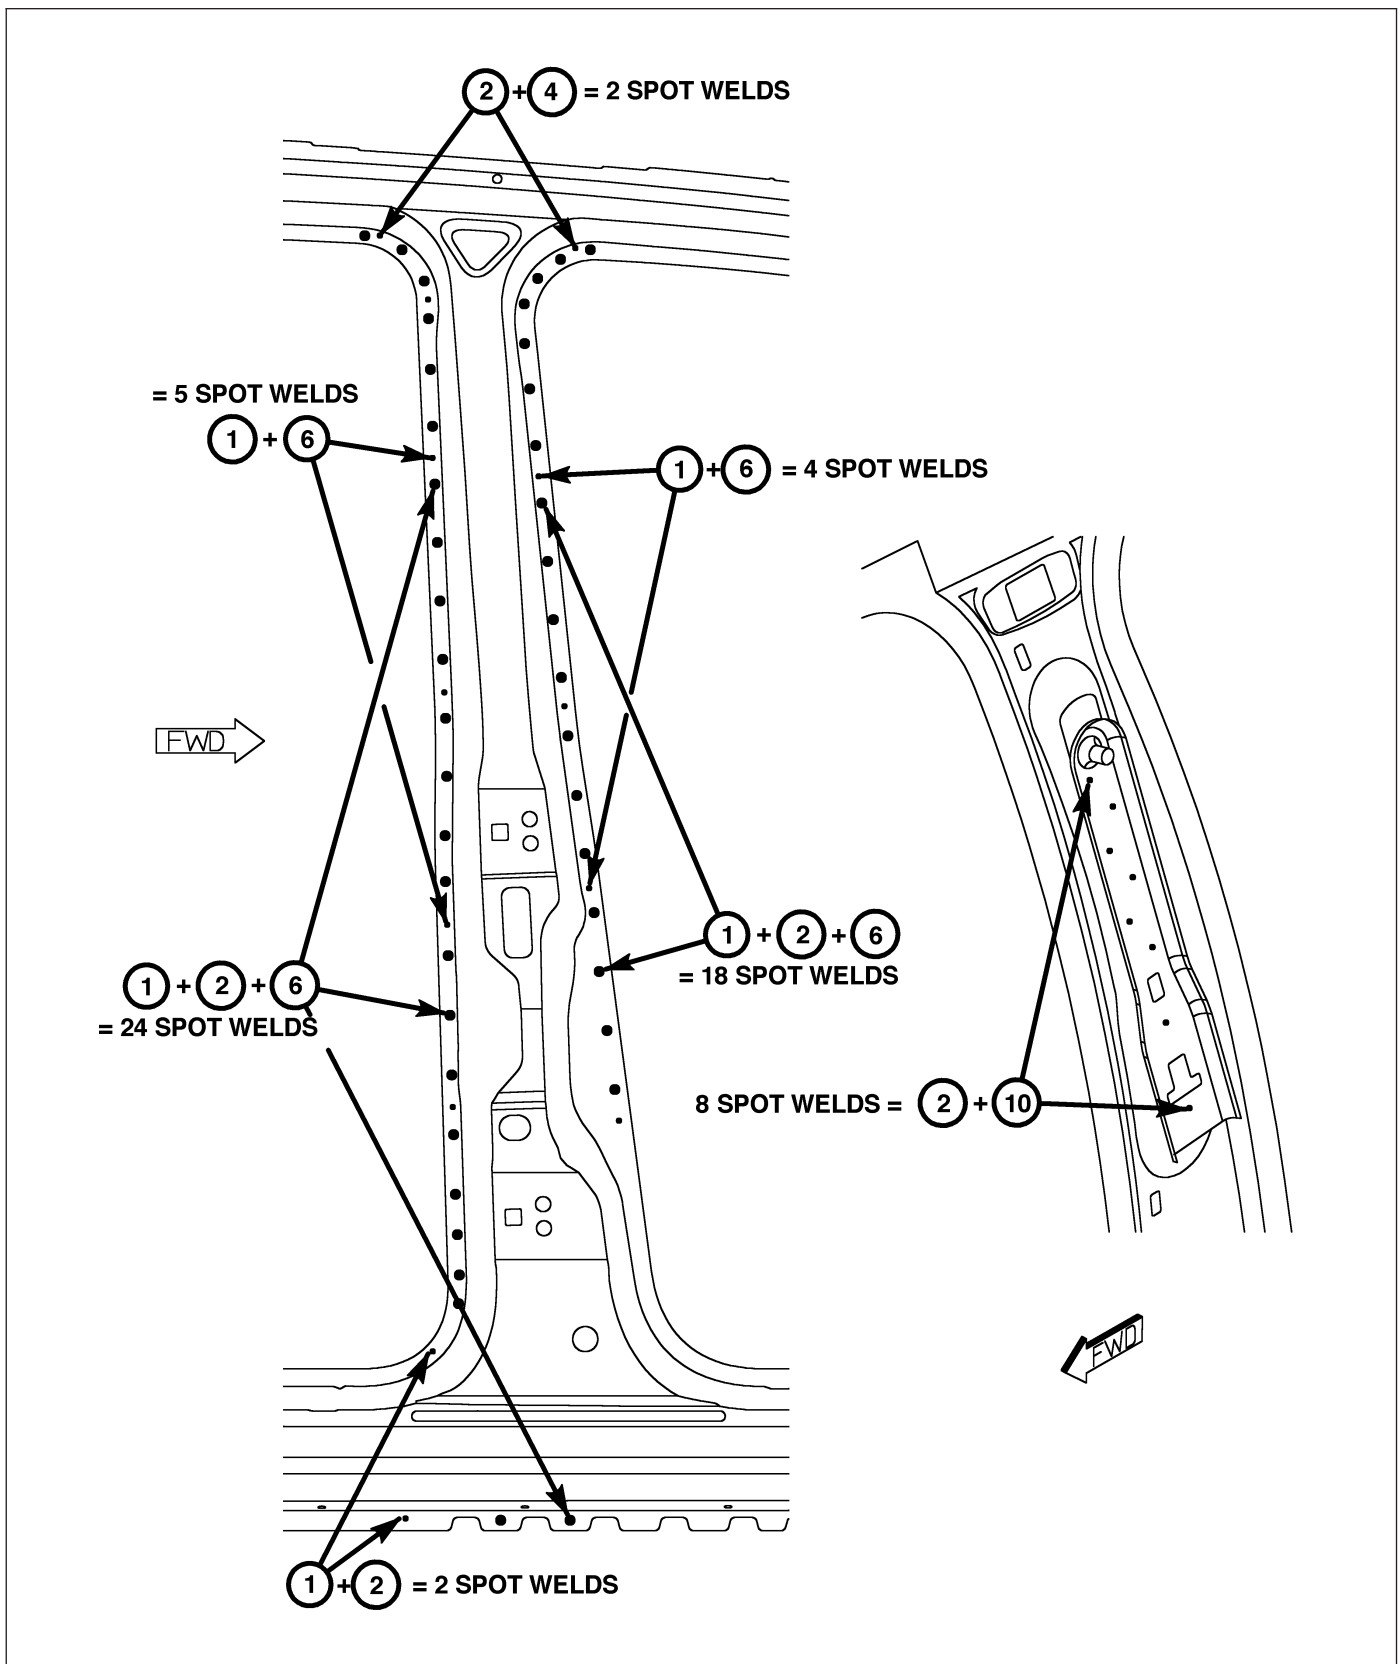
BODY SIDE PANEL ASSEMBLIES AND B-PILLAR
